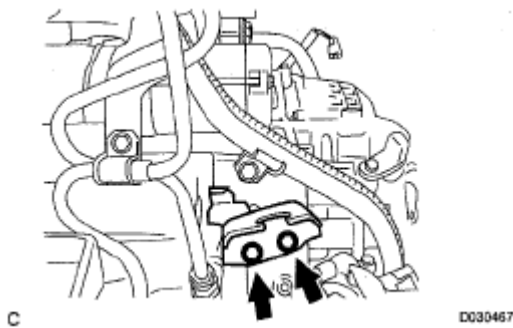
Locating Transmission Control Cable Bracket Bolts
